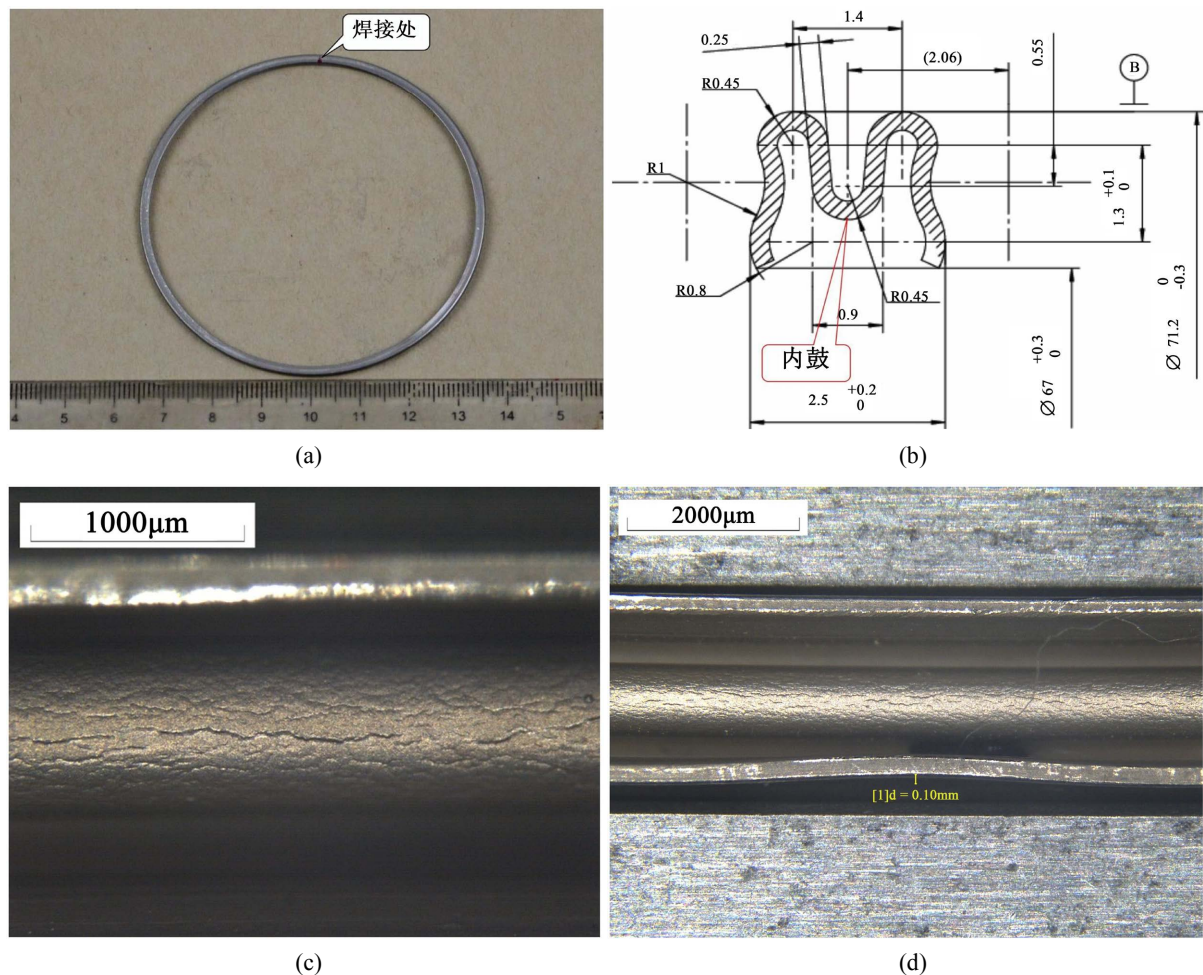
Macroscopic of crack topography in the inner drum. (a) W-type sealing ring overall appearance; (b) Inside drum mark; (c) Inside drum circumferential crack; (d) End deformation
